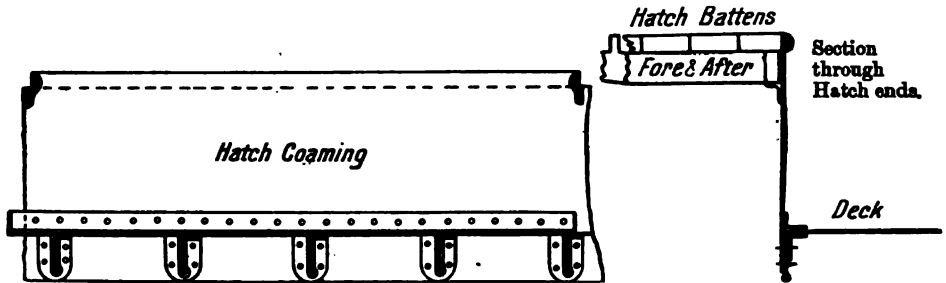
Side Elevation of Hatch Coaming Plate, showing angle connection to deck plating and collars on beam ends.
